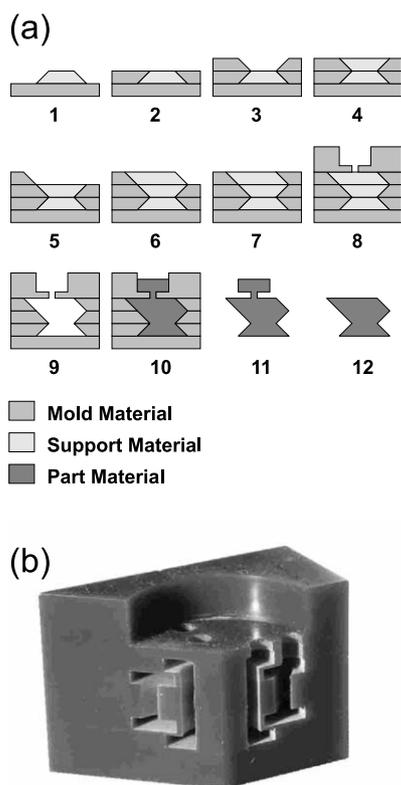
Processing steps for MoldSDM (a) and section of wax mold (b).
